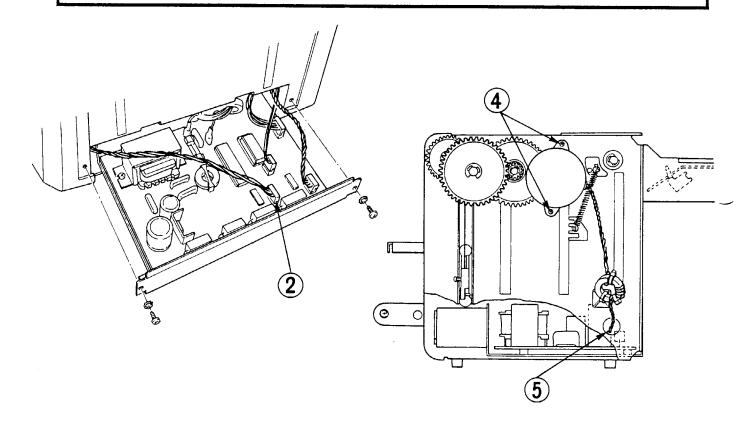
ELEVATOR MOTOR REMOVAL
